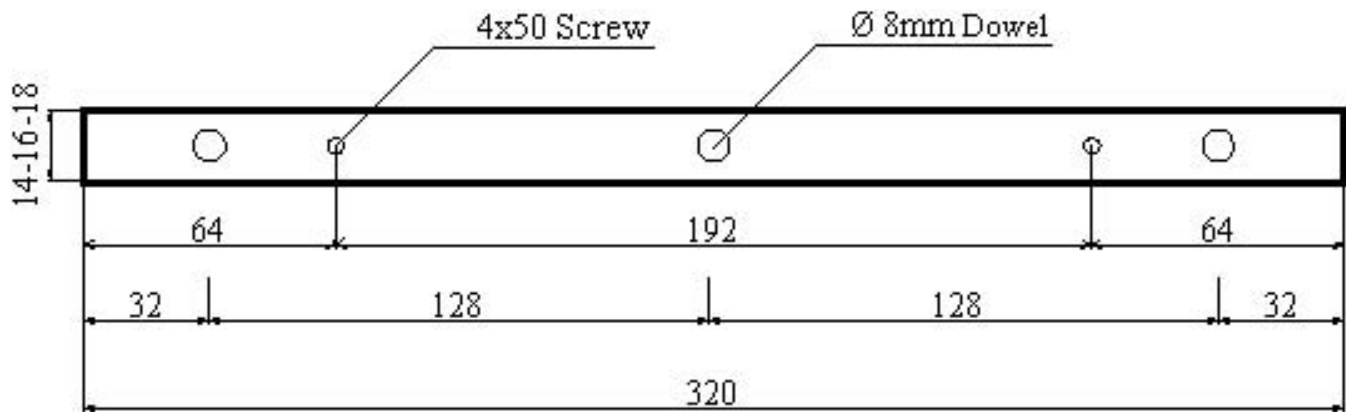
Dowel and screw hole centers (measurements in millimeters) of the test specimens.
